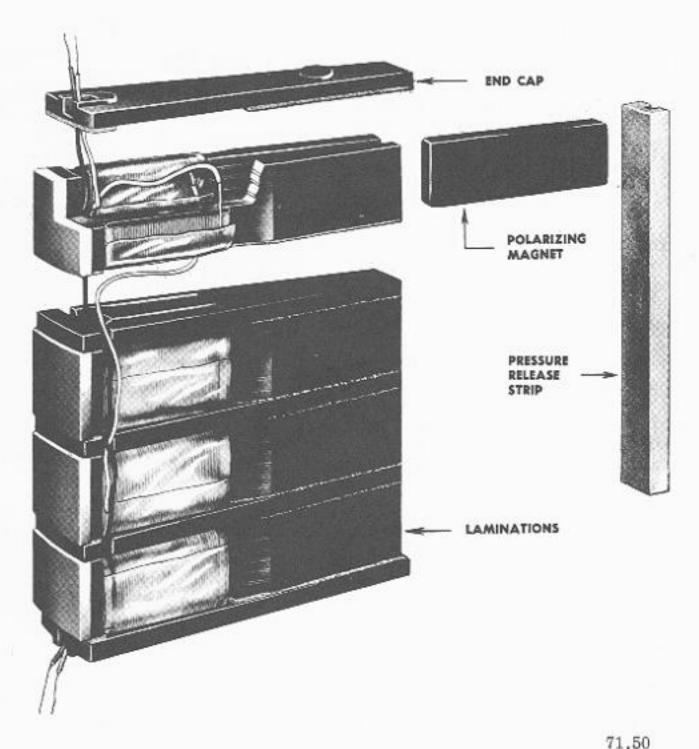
Exploded view of one scanning sonar transducer stave.
